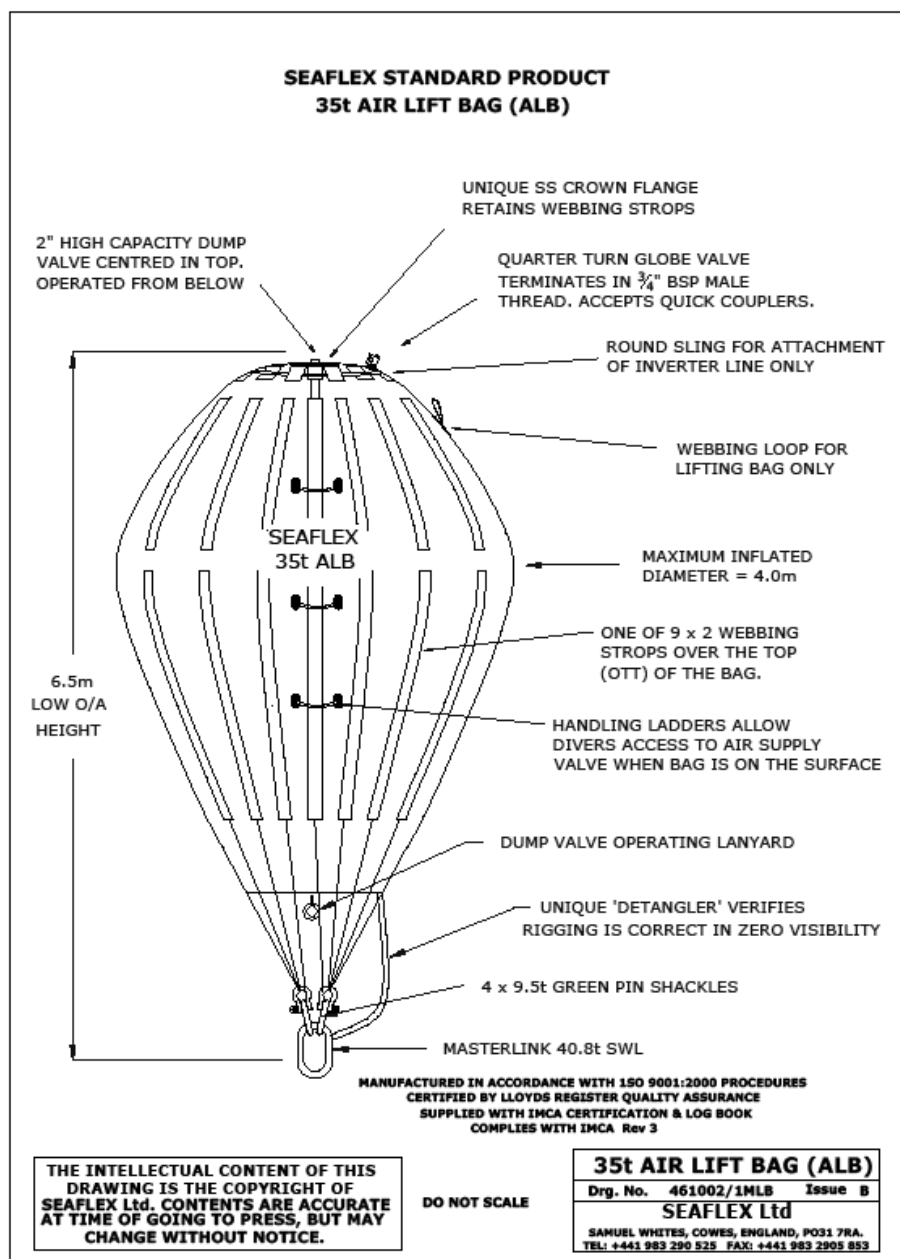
Design drawing for a Seaflex 35t air lift bag [71]
